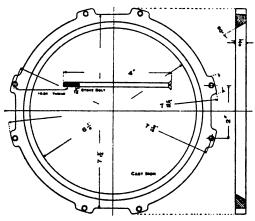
RING FOR CLAMPING STATOR SHERTS
